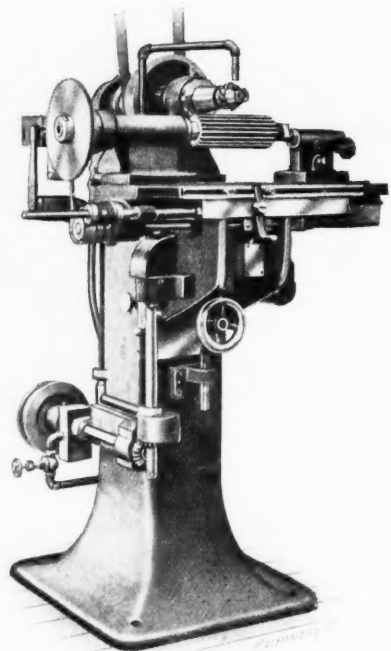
The Sloan & Chace Automatic Gear Cutter for Small and Medium Work.
